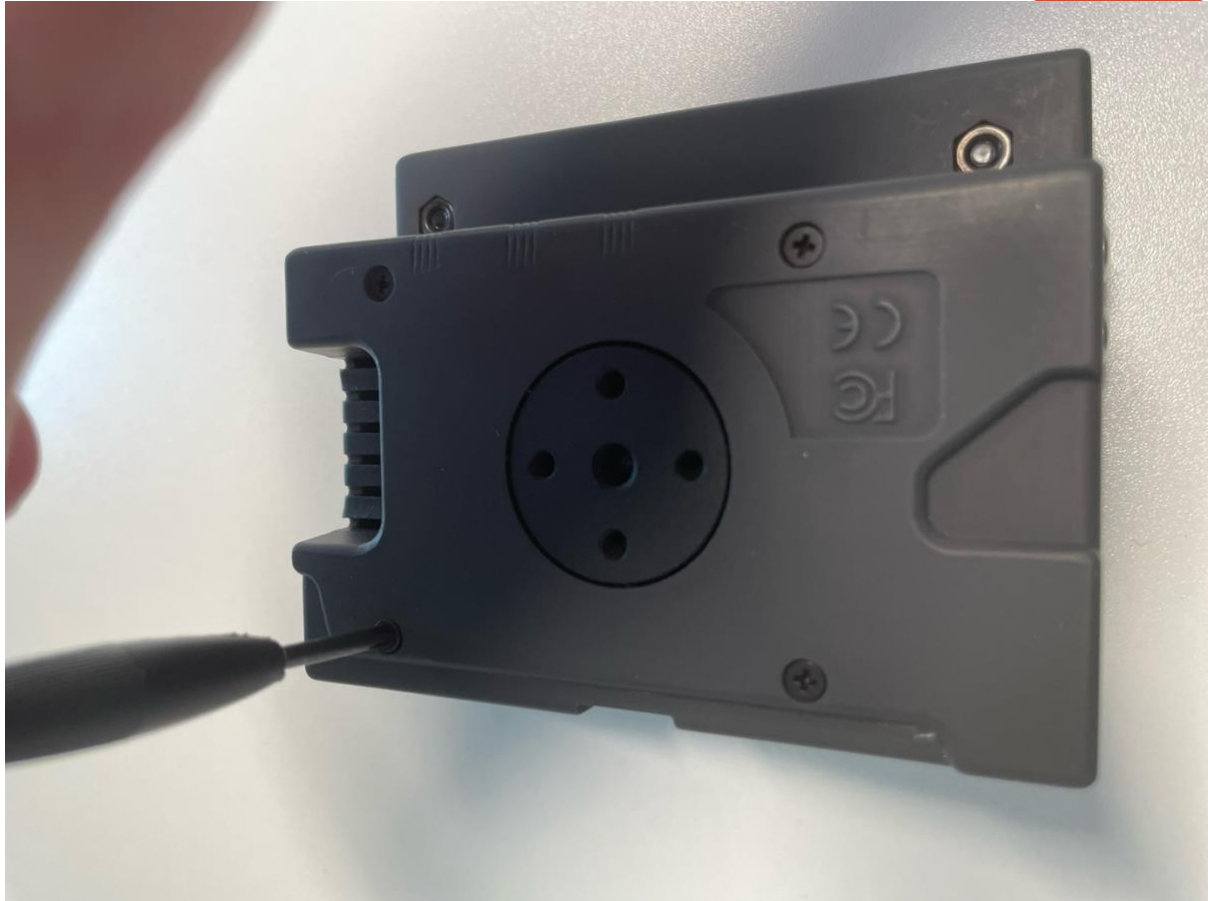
Final step. Turn the AStarBox over and screw the four small black screws into the four recessed holes on the bottom of the case. This will secure the electronic assembly to the case.
